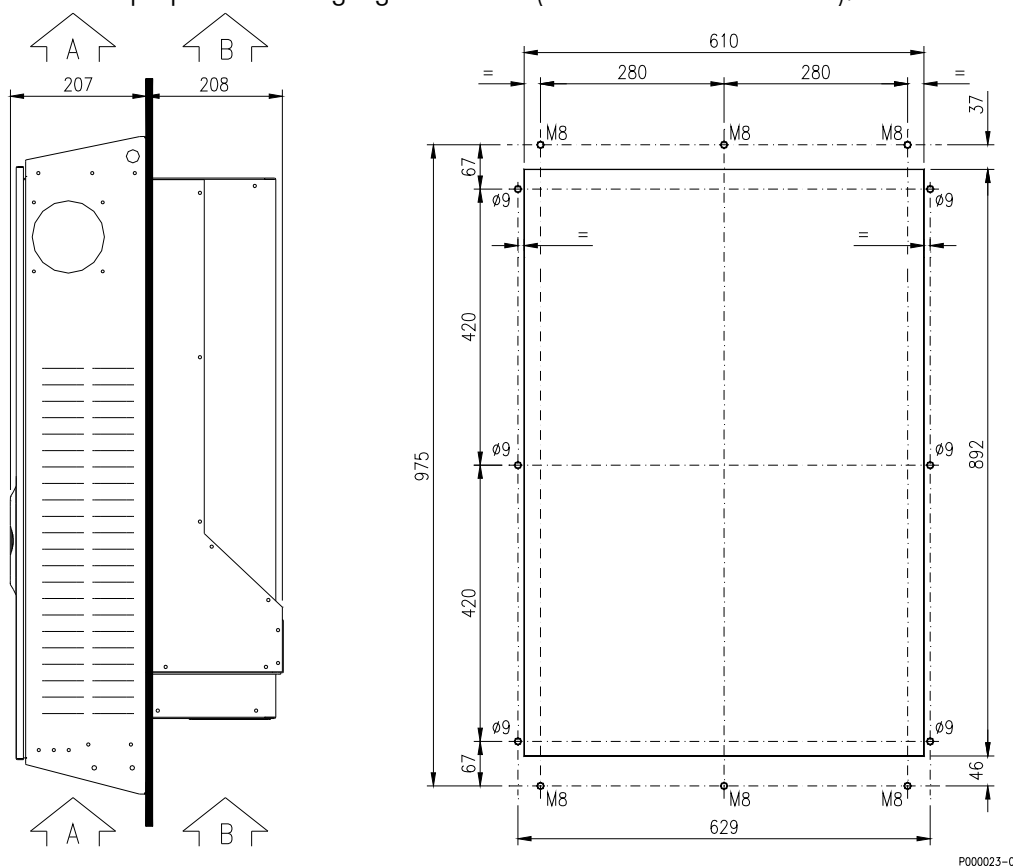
Through-panel assembly and piercing templates for SINUS PENTA S50
